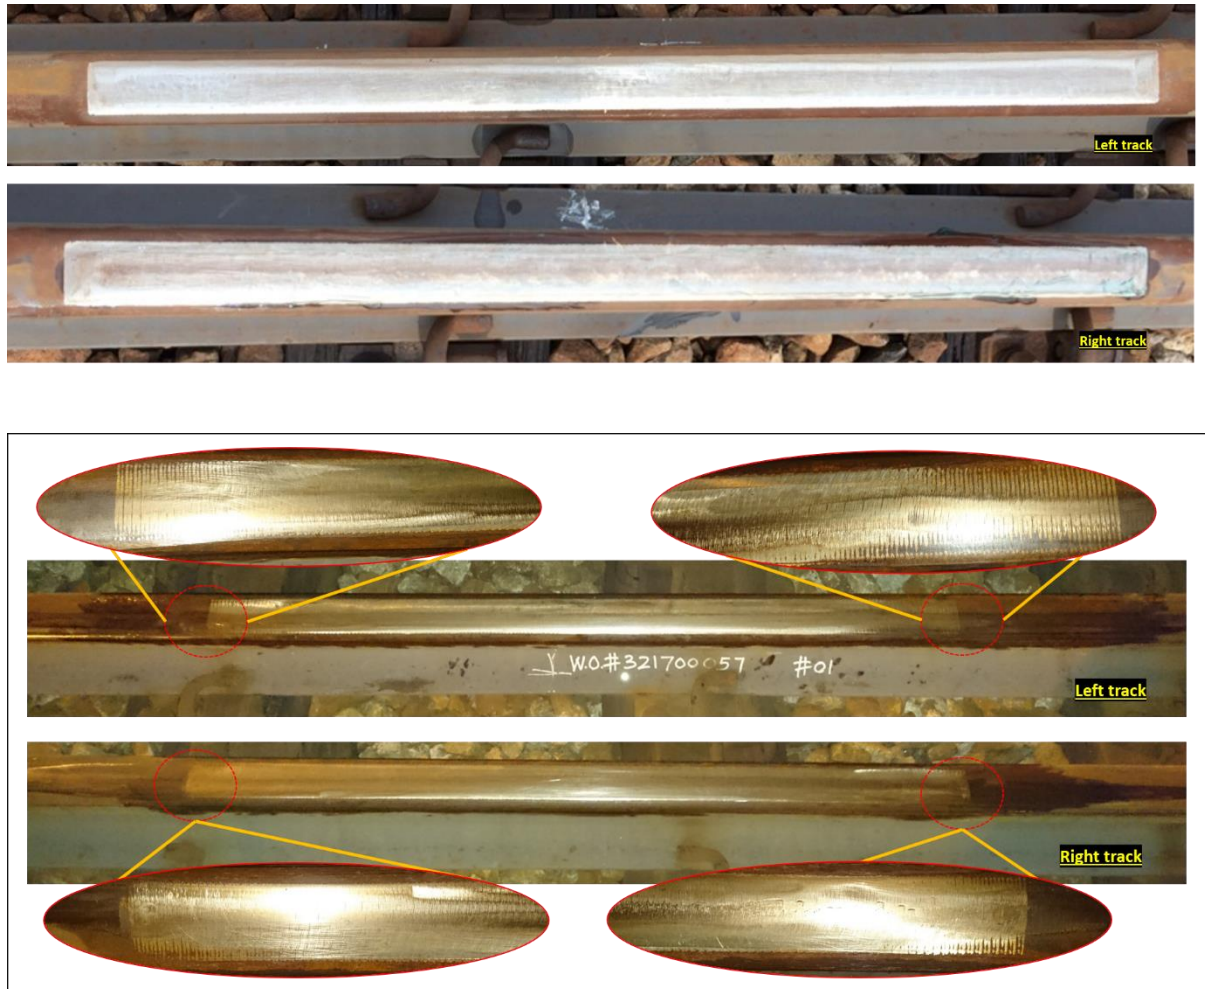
Visual inspection of laser cladded rail specimens on test track
